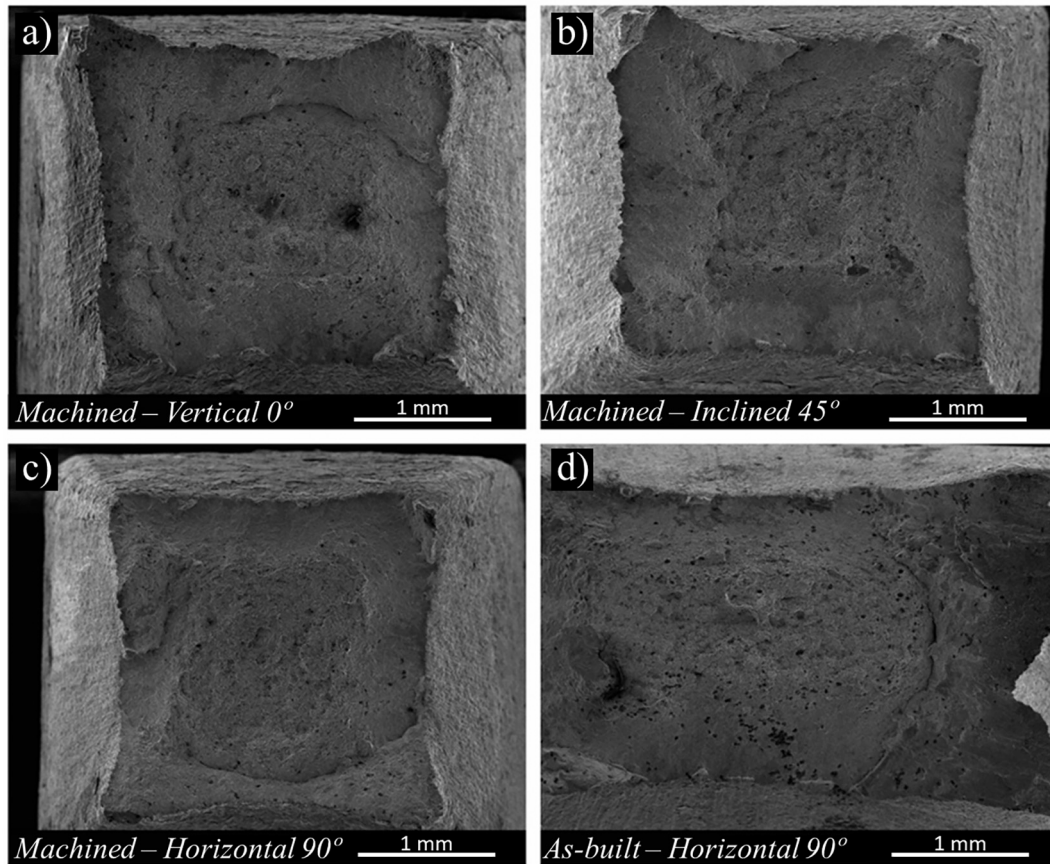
Fracture morphology of tensile specimens at low magnification: (a) vertical, machined condition; (b) inclined, machined condition; (c) horizontal, machined condition; (d) horizontal, as-built condition.
